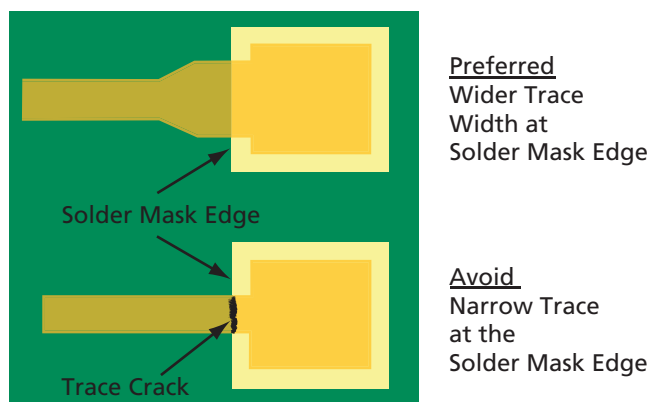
• Wider Trace under Solder Mask Edge to Avoid Trace Cracking
